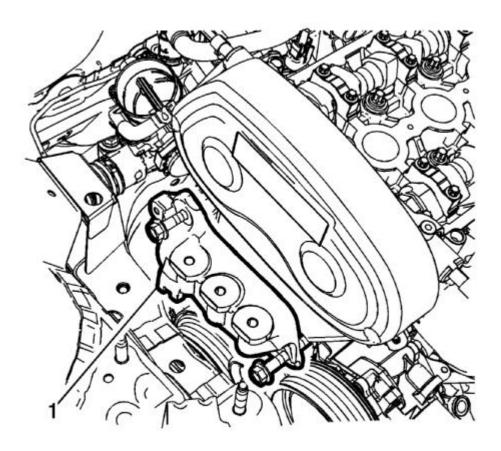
Engine Mount Bracket Courtesy of GENERAL MOTORS COMPANY
